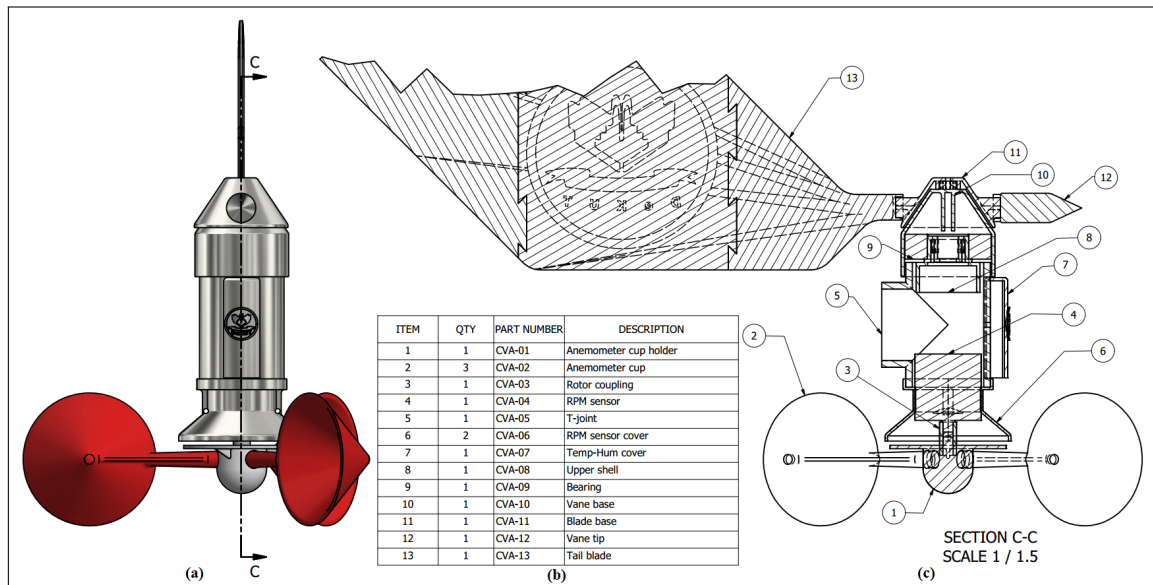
Cup-vane virtual assembly: (a) full assembly; (b) parts list and (c) sectioned view (C-C).
